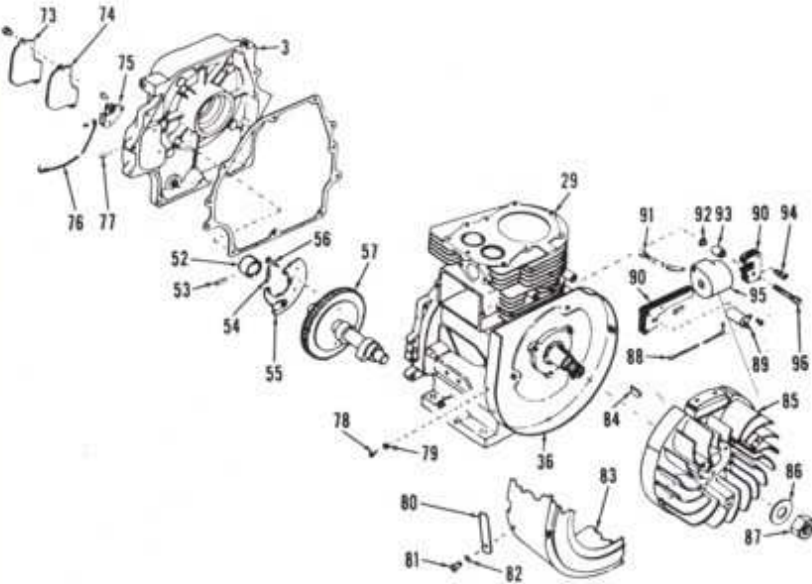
Exploded view of magneto ignition components used on Models HH80, HH100 and HH120. Timing advance and breaker points used on engines equipped with battery ignition are identical.
